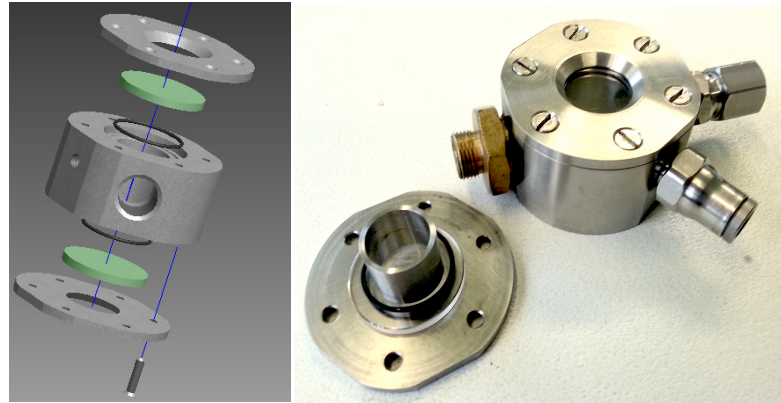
(Left) An exploded view of the pressure chamber components from the final CAD design, (Right) the final chamber with the base plate removed to show the window, o-ring and inner sample holder
